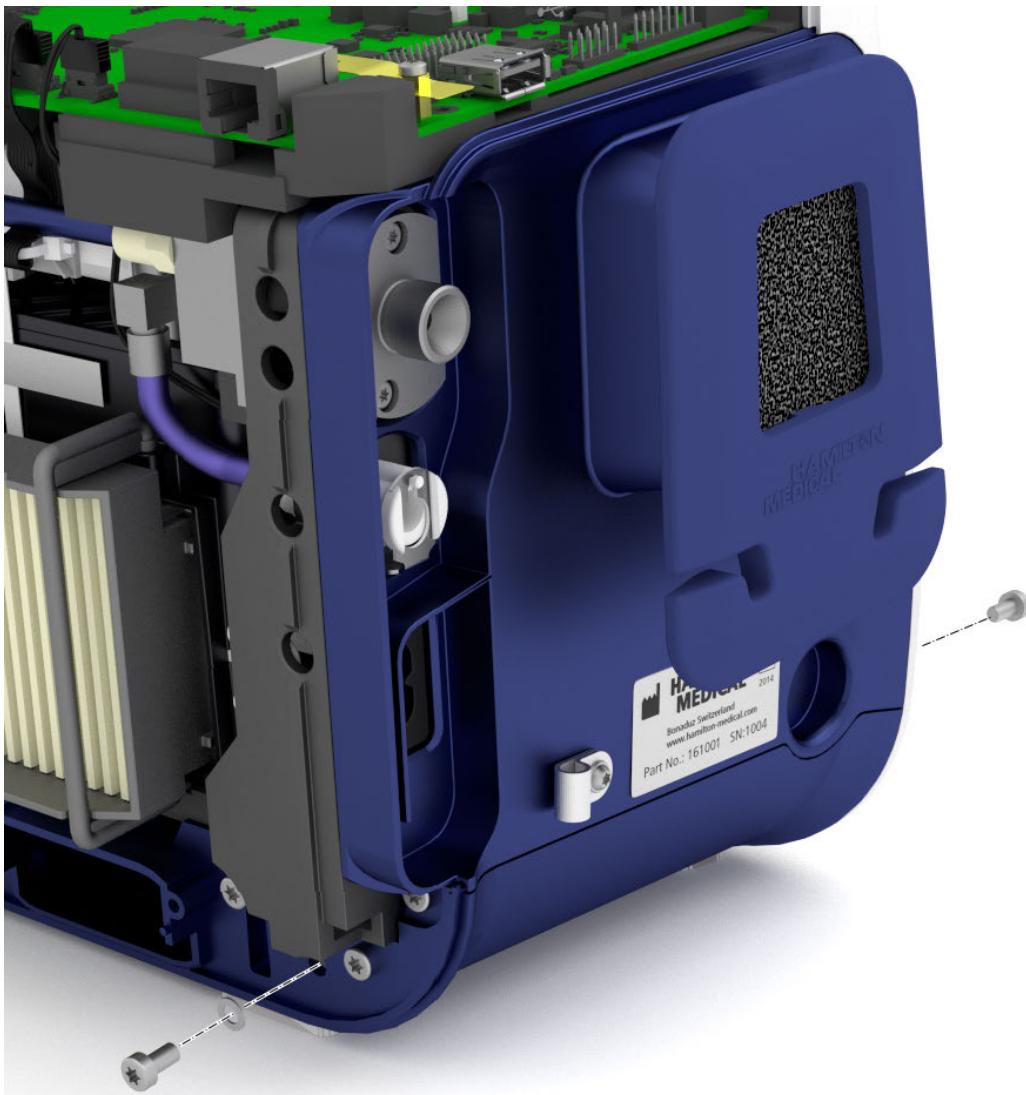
Mounting of the left side cover improved (Washer introduced)
